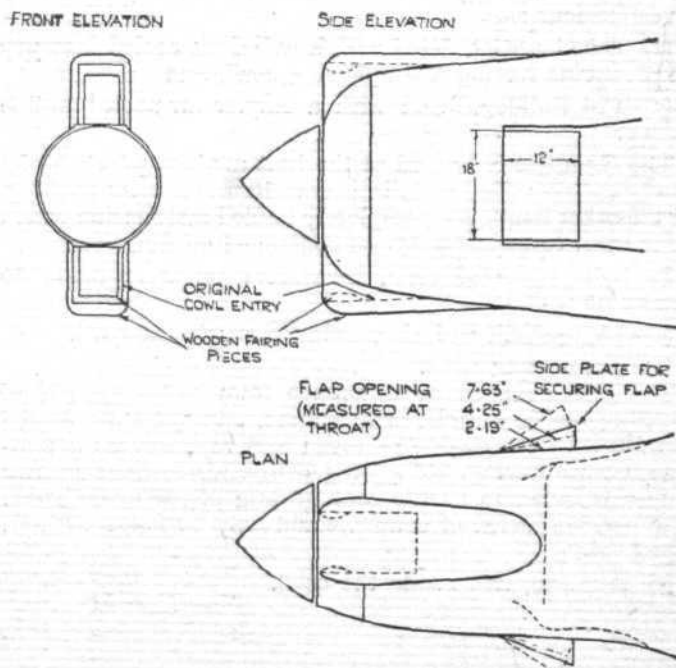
Cowling tests on Rapier-Bulldog. Details of faired entry used in conjunction with controlled exit.
